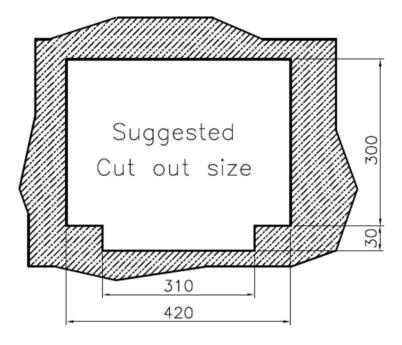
AFL-19B-915 Cutout Dimensions (units in mm)
